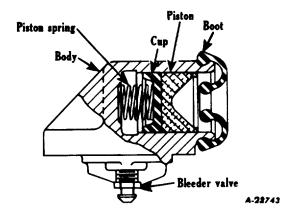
Typical Wheel Cylinder (Single-Piston Type)
